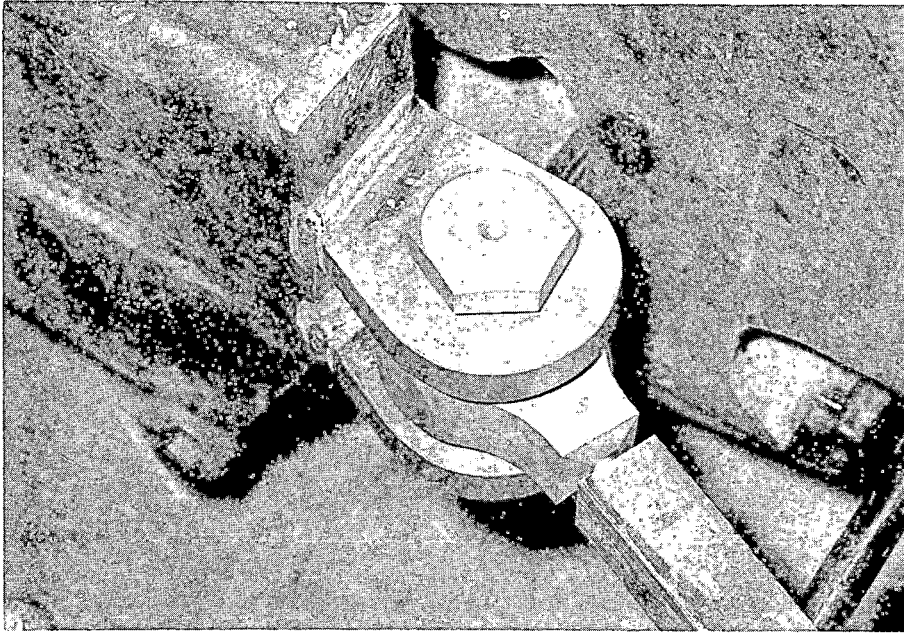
REDESIGNED CROSS-LINK ARM; NEW BRACKETS AND ROD-END BEARING PRIOR TO WELDING.
